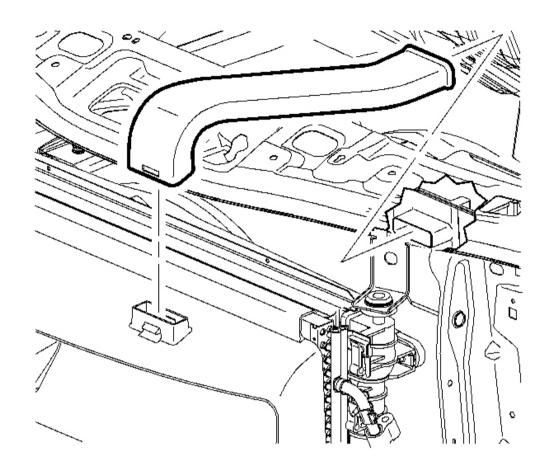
View Of Battery Box Inlet Air Duct Courtesy of GENERAL MOTORS CORP.
